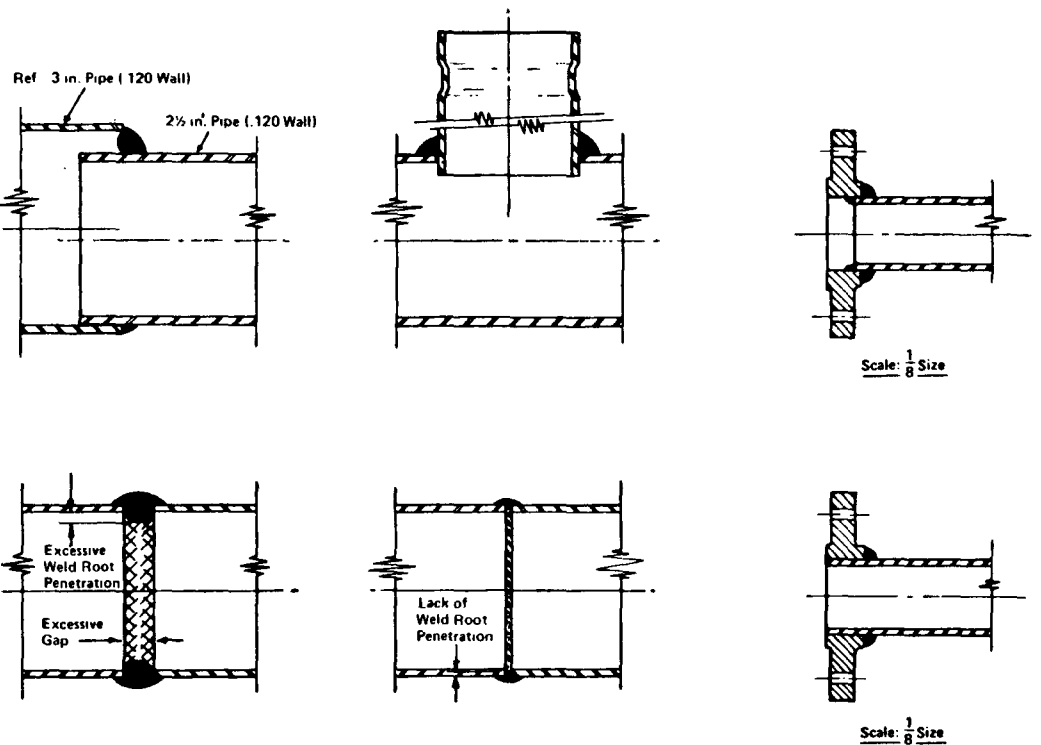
(c) Unacceptable Weld Joints.
